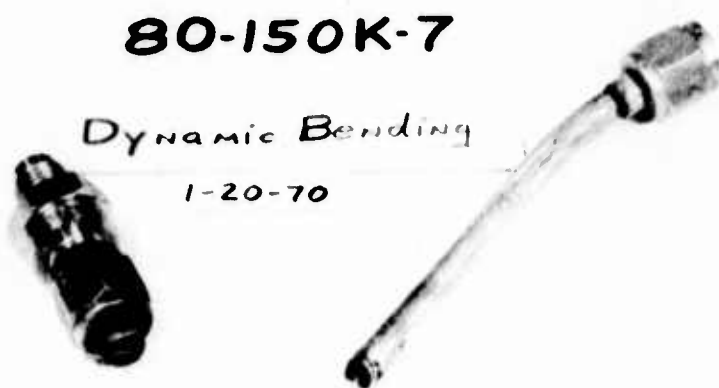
View of S.S.-1/4 Valve After Dynamic Bending Test.
